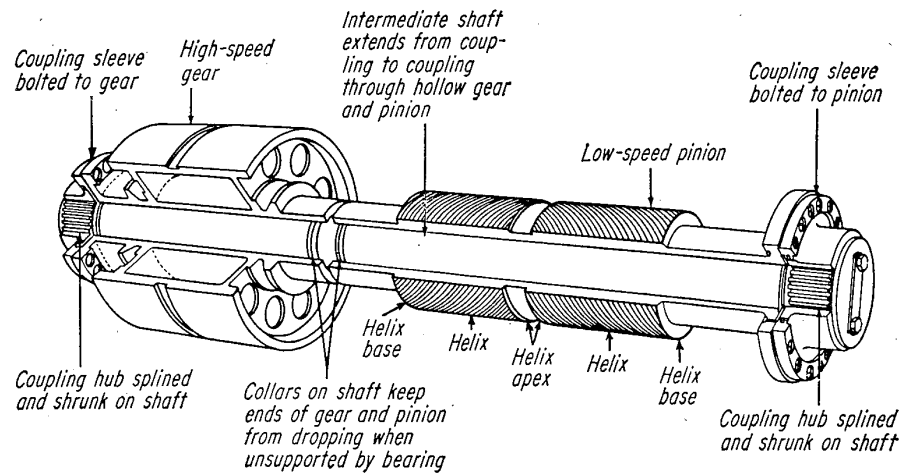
Detail of articulated design of high-speed gear and low-speed pinion. Note intermediate shaft passing through hollow pinion and gear and the fact that both pinion and gear have their own separate bearings.
